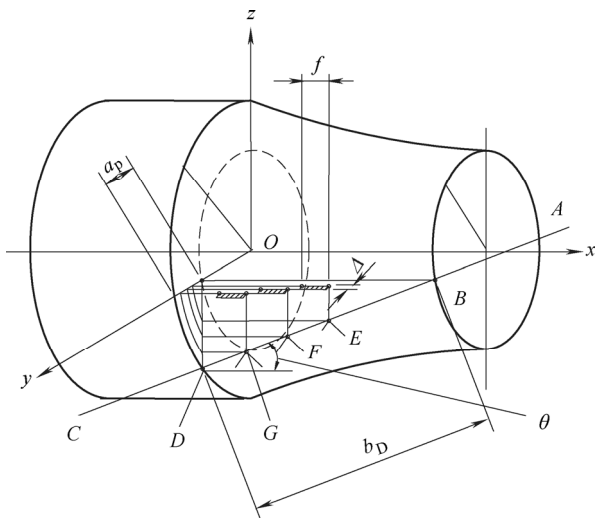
Cutting layer bifurcating model for a multi-tooth tool
